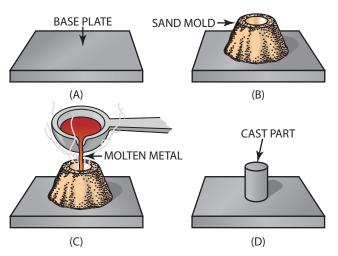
Direct casting: (A) base plate to have part cast on it, (B) sand molded into shape desired, (C) pouring hot metal into mold, and (D) part cast is now part of the base plate.
